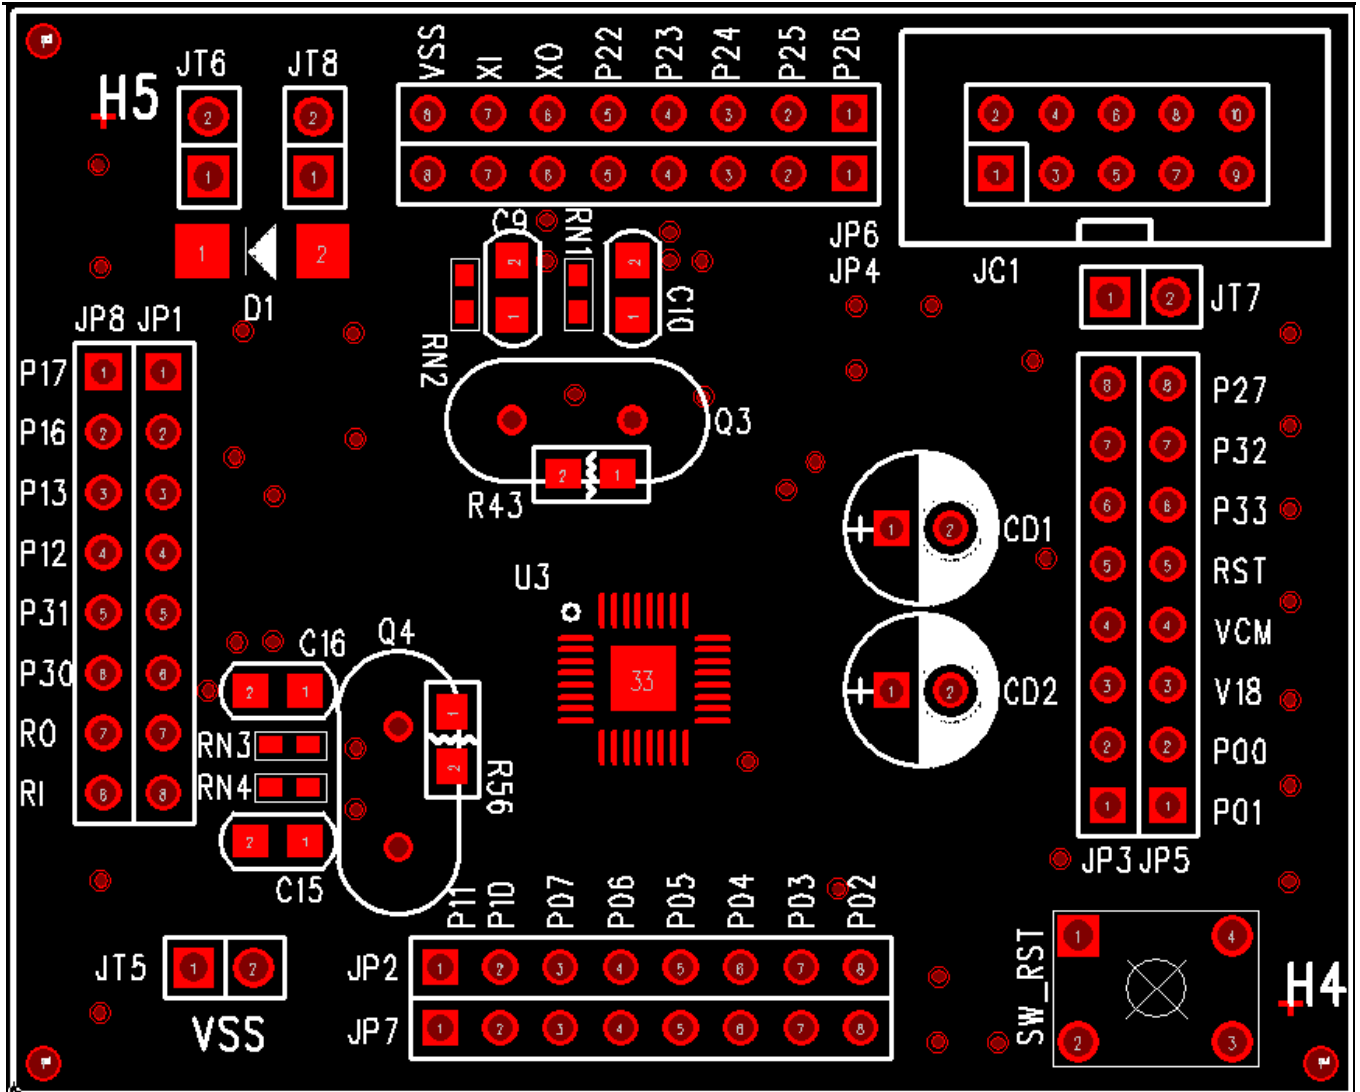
IS31CS8964 Evaluation Board Component Placement Guide - Top Layer
